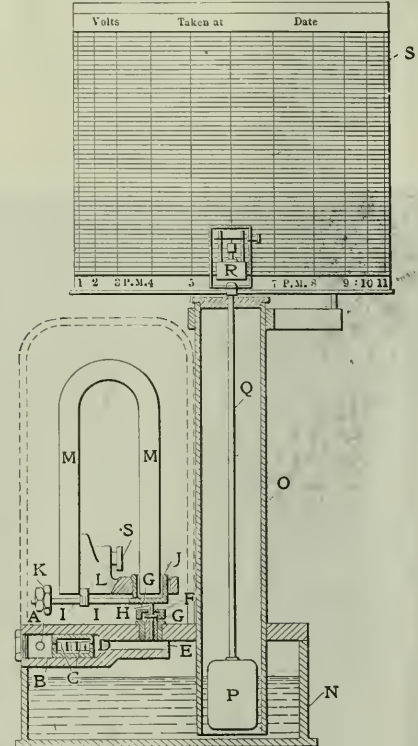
CONSTRUCTION OF COLUMN TYPE METER
